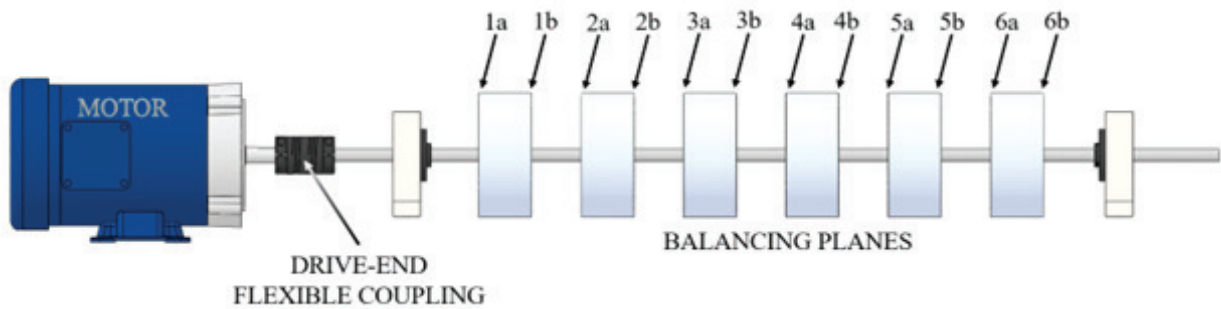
Cross-sectional view of the rotor assembly, including the balancing planes (1a–6b), coupler, and driver. Each balancing wheel has two balancing planes spaced by approximately 2 in. where 2-56 size bolts were installed to balance the machine.
